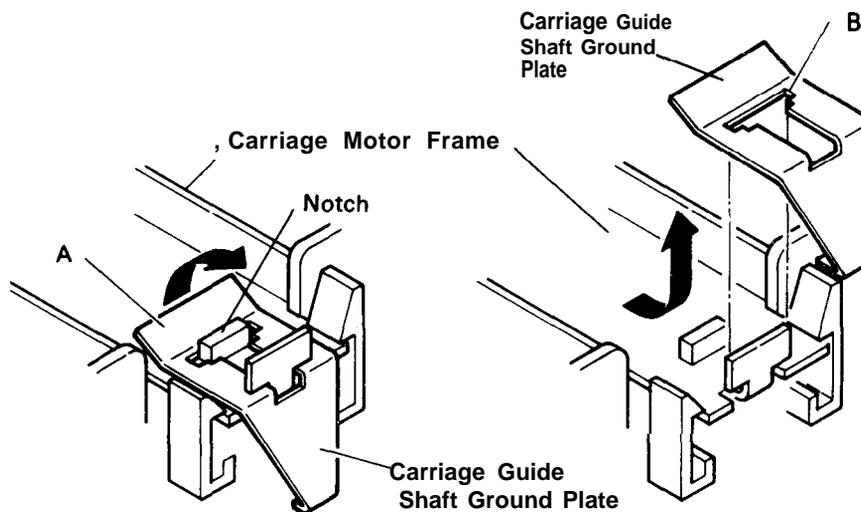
Removal of Carriage Guide Shaft Ground Plate
